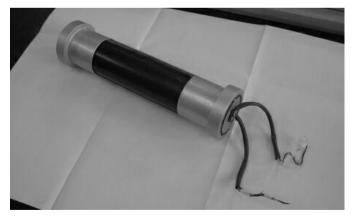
Test piece manufactured with the use of the RTM technology, with ducts from strain gauges located on the inner surfaces of the metal parts.
